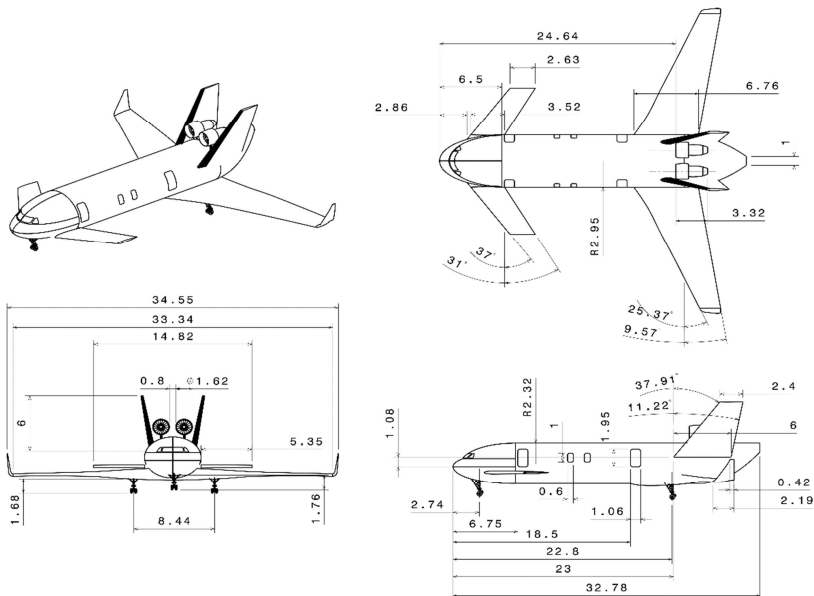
Technical drawings of the RELOAD aircraft with dimensions in m
